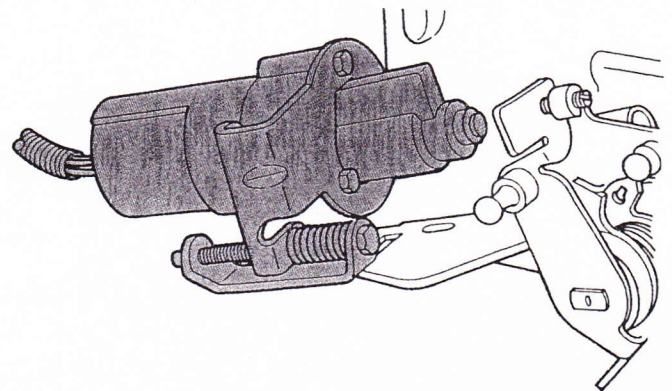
The idle speed control (ISC) motor stem contacts the throttle linkage. *Courtesy of Ford Motor Company
